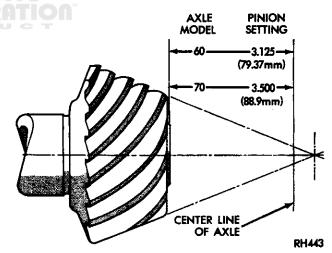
Drive Pinion Gear Standard Depth/Distance
